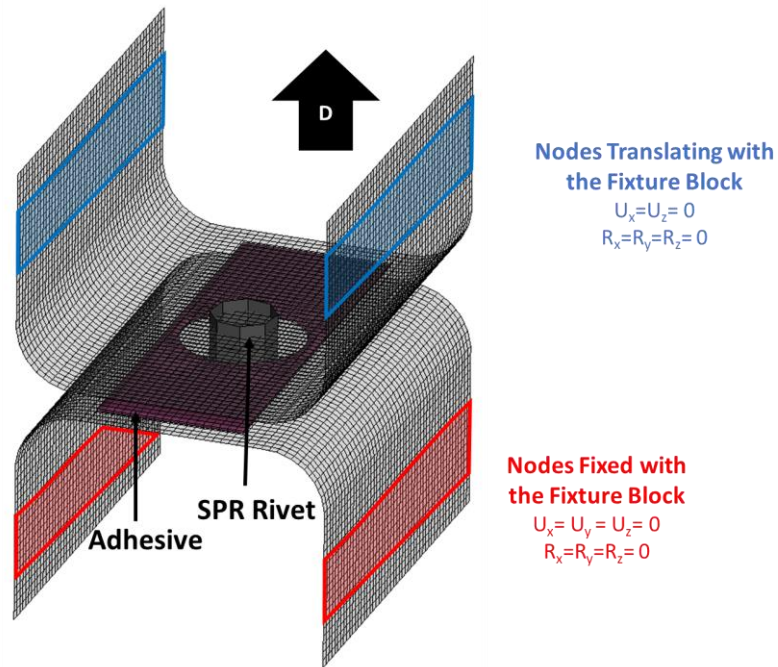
The H-specimen model made with 2 mm sheet material and joined using the CZM-Constraint model, showing the adherends and fixturing parts with boundary conditions. (Similar models were created for each adherend sheet thickness)
